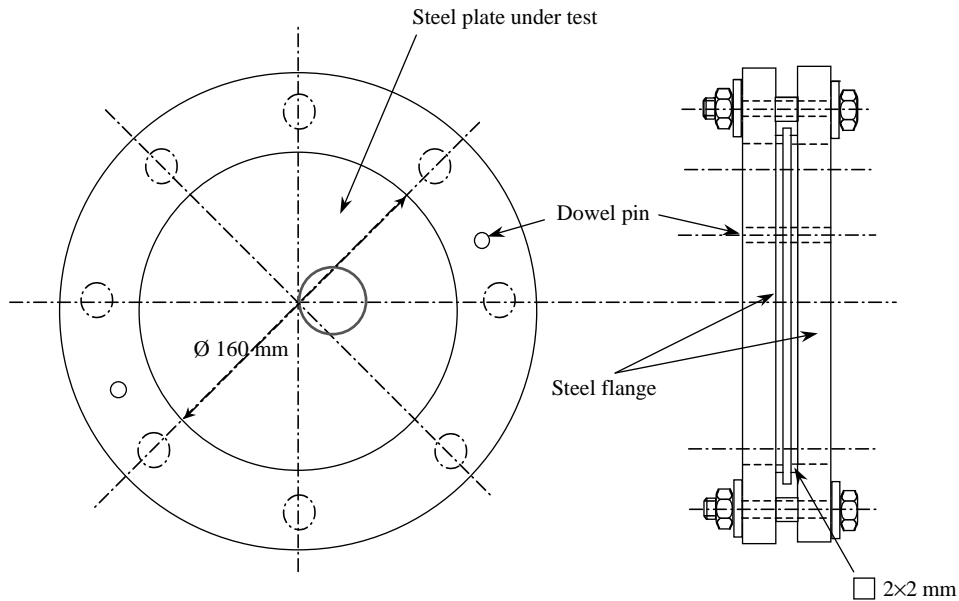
Steel flange fabricated for the clamping of the steel plate under test.
